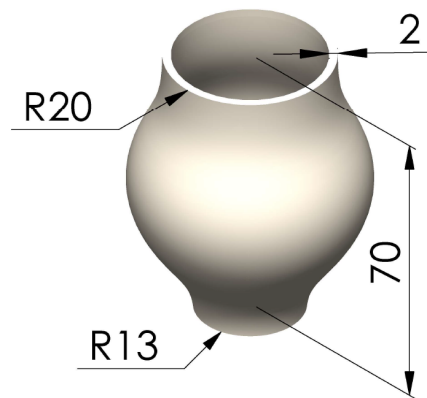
Model of the designed amphora to be manufactured in composites (all dimensions in mm).
